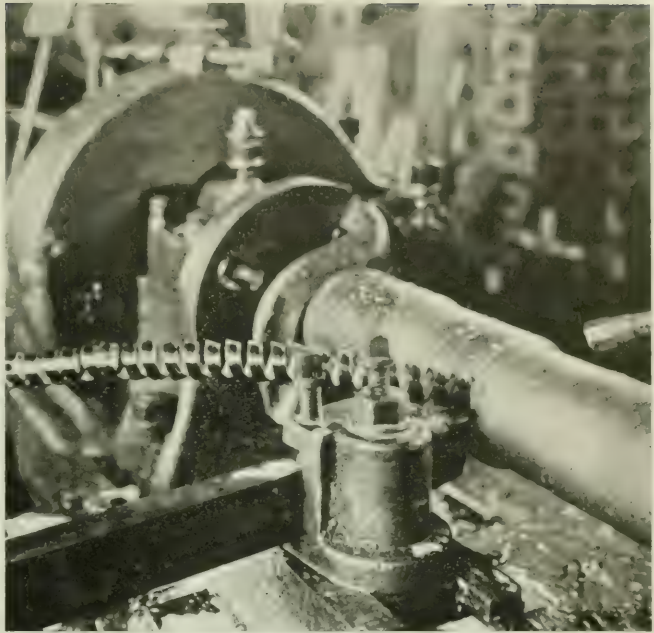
MACHINING 4.5 IN. SHELL FORGING AT 70 FT. PER MIN. CUT, $\frac{1}{4}$ IN. X 7-32 IN. FEED.
